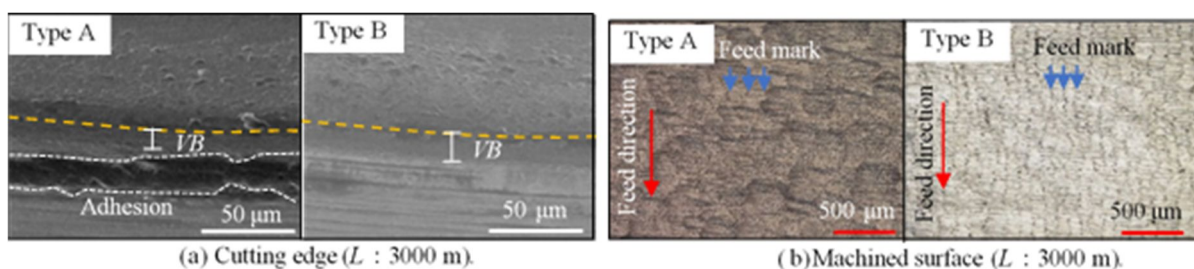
Photograph of cutting edge and machined surface in each oil supply type.
